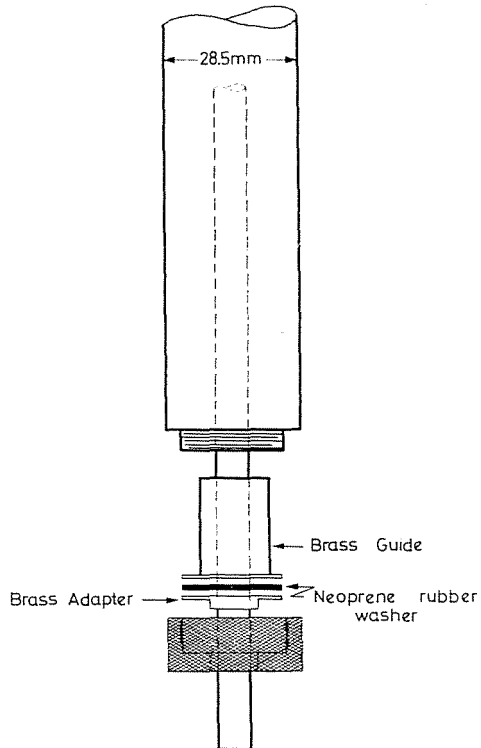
Detailed drawing of the nozzle-sleeve arrangement
